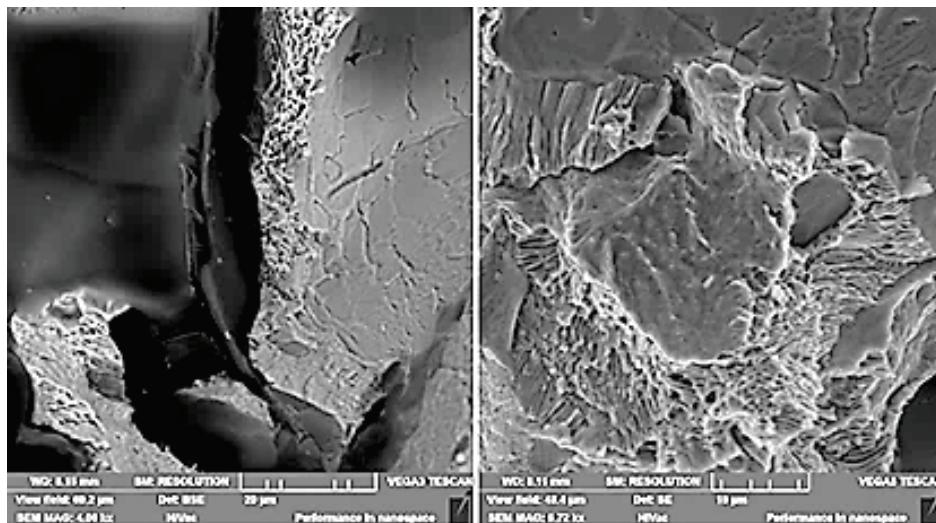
The fracture surface of the ventilated brake disc.
